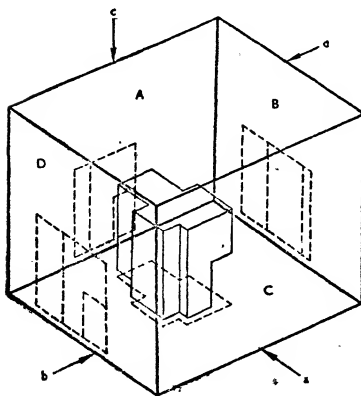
Example above gives the normal British practice for arranging a set of working drawings where it is necessary to show plan and elevations.
